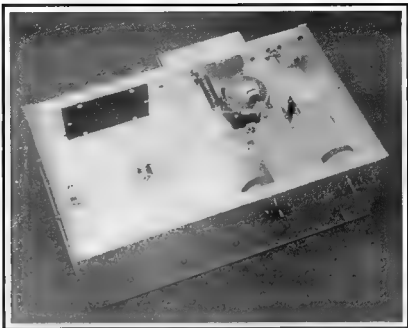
Oblique view of amplifier plate assembly. The 3CX800A7 and socket are mounted directly in front of the small box covering the high voltage feedthrough capacitor. Adjacent to the valve is the air wound RF choke. The air intake is on the rear wall directly behind the stripline. At the plate end of the line are the tuning and loading flippers which move back and forth to a section of the plate line. This section is bent at right angles to the main line. The two eccentric drive cams are visible behind the front panel. A heavy shorting strap is positioned along the plate line to establish resonance.
